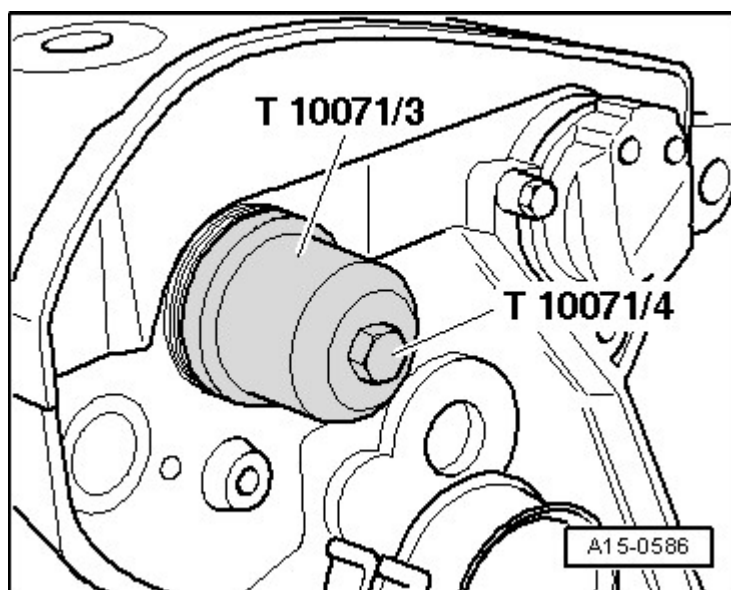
Pressing In Gasket Up To Stop Using Thrust Sleeve T10071/3 And Bolt T10071/4
